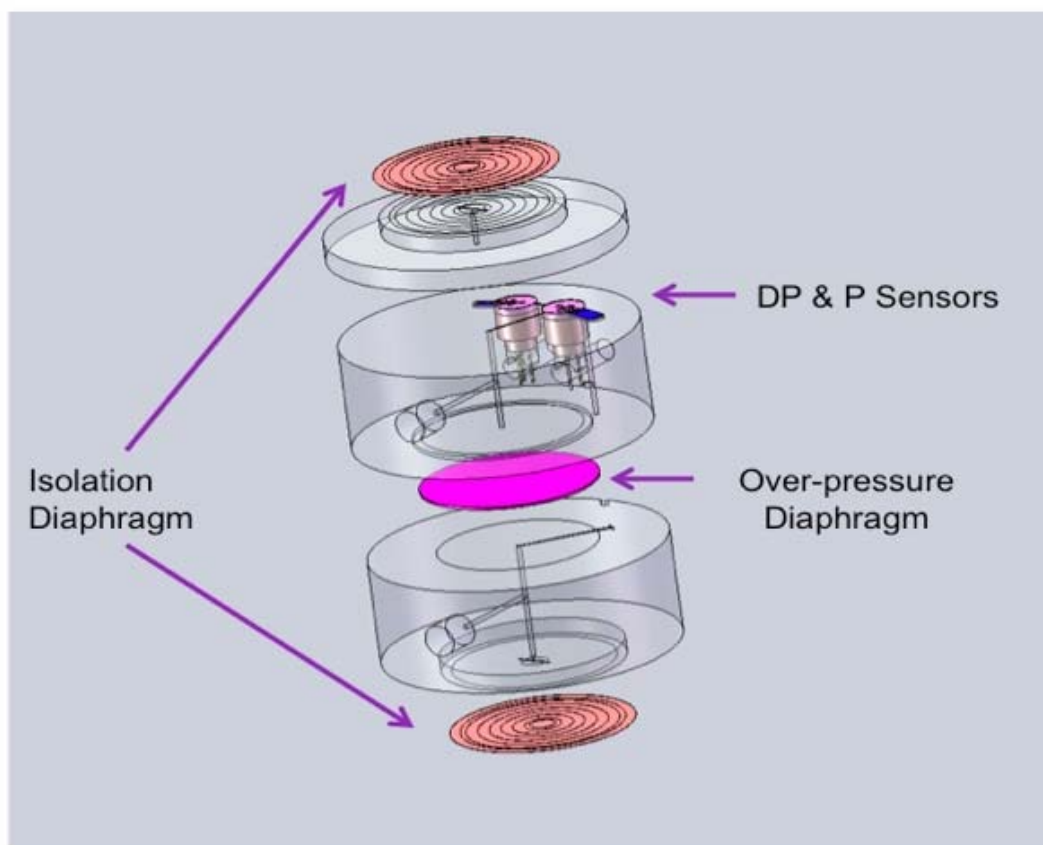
Exploded view of cell containing xHP/HT sensor chips.
